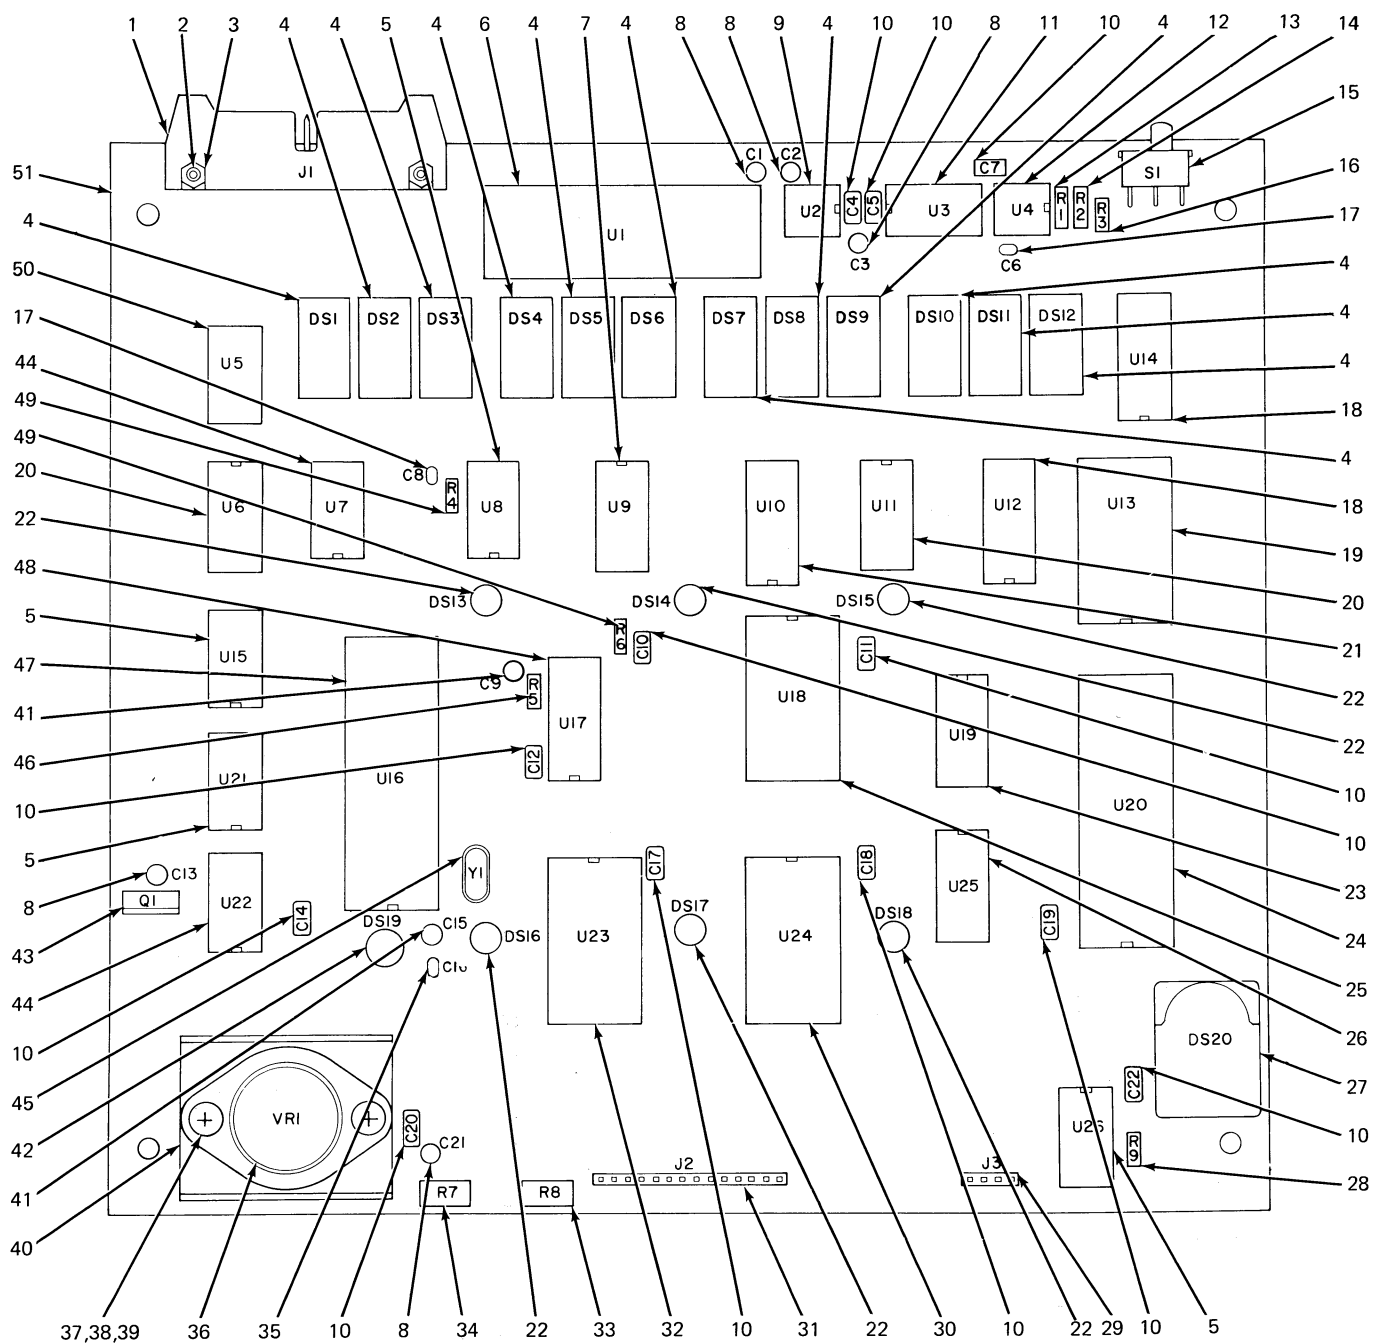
CLS Controller, Circuit Board Assembly, Parts Breakdown
